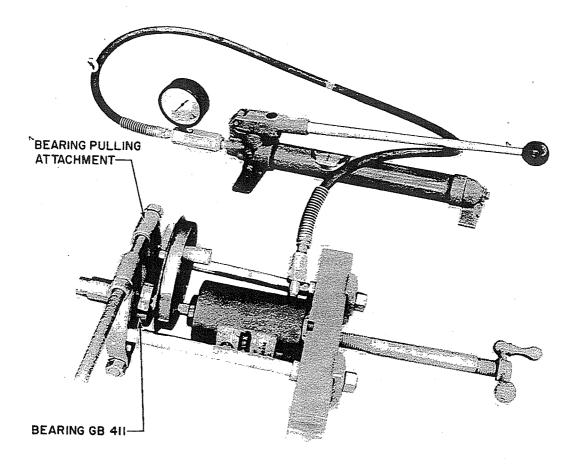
2 to 1 Shaft, Installation of Bearing GB411
